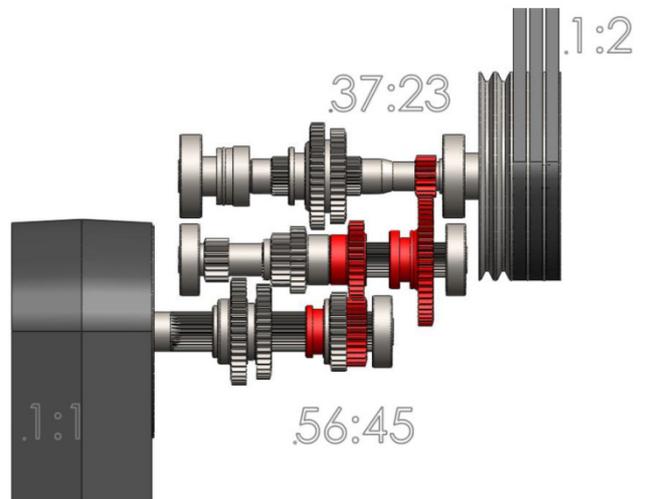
Model with meshing gears gearboxes (2800 rev/min)
